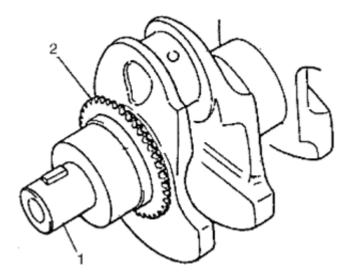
Identifying Oil Pump Drive Sprocket And Crankshaft Courtesy of SUZUKI OF AMERICA CORP.
